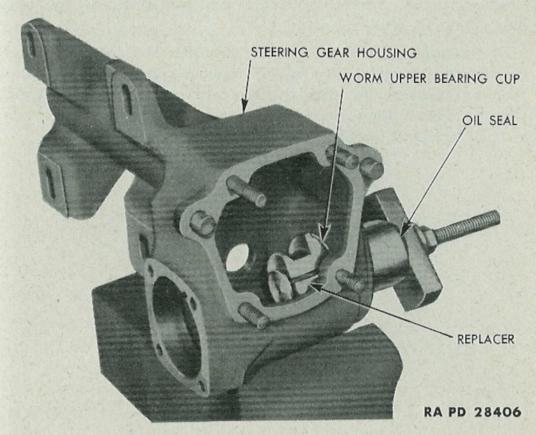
Installing Worm Upper Bearing Cup and Oil Seal with Replacer 41-R-2395-110
